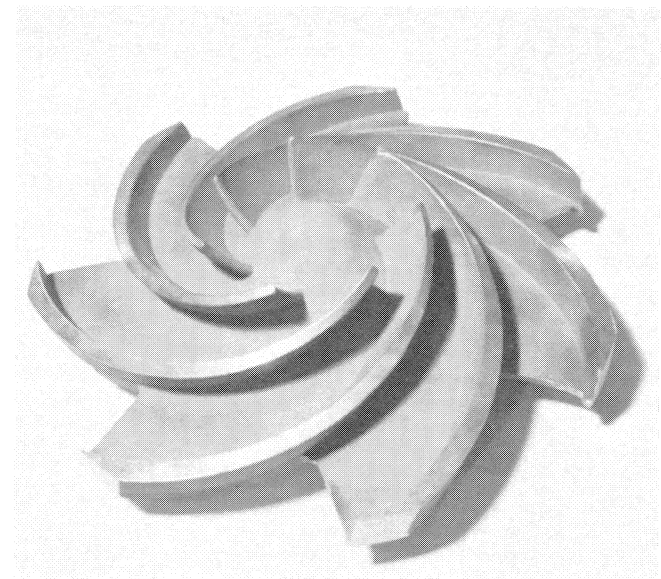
Test Impeller. Note scallops in impeller back shroud.
